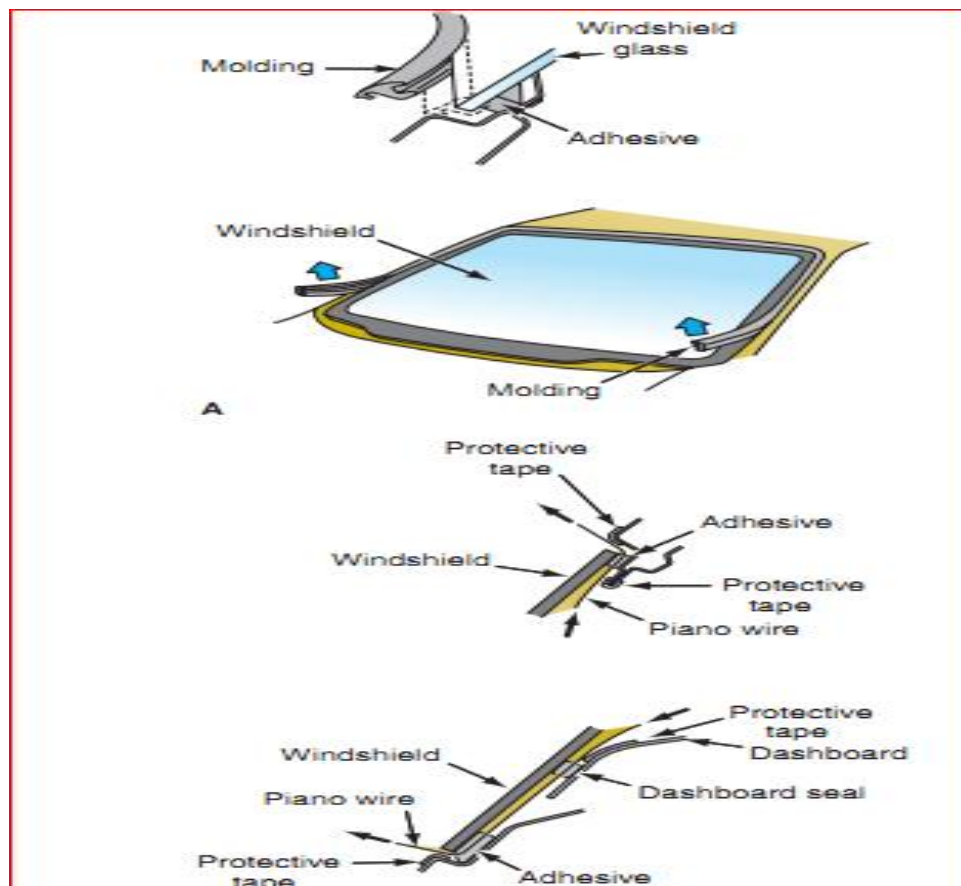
FIGURE You can cut through windshield adhesive with Piano wire. Be extremely careful not to cut your hand!
